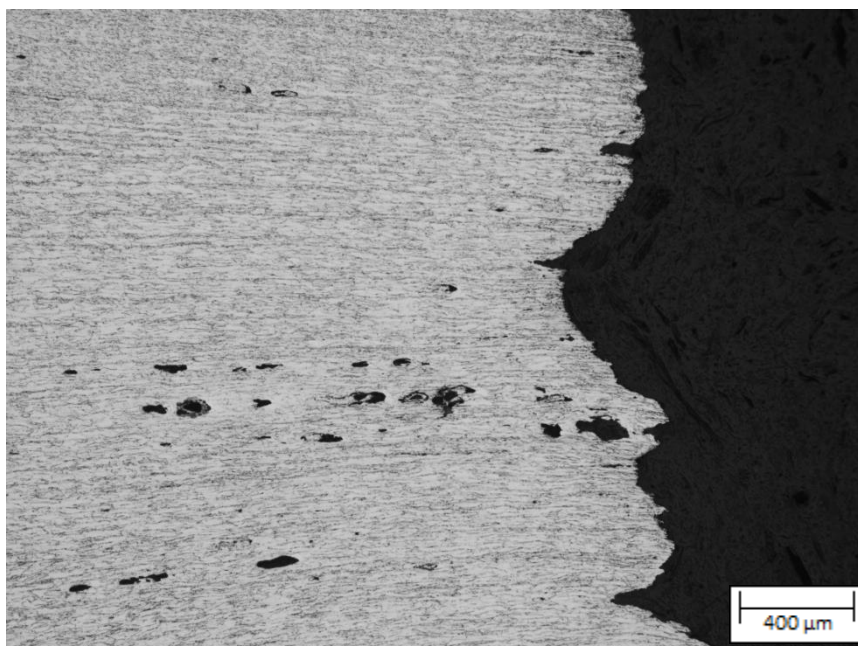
Light microscope image of a polished section of the fracture surface of the reduced section hot round tensile test specimen of sample 3 (No heat treatment prior to welding and a 672h PWHT at 635°C). RA = 77%
